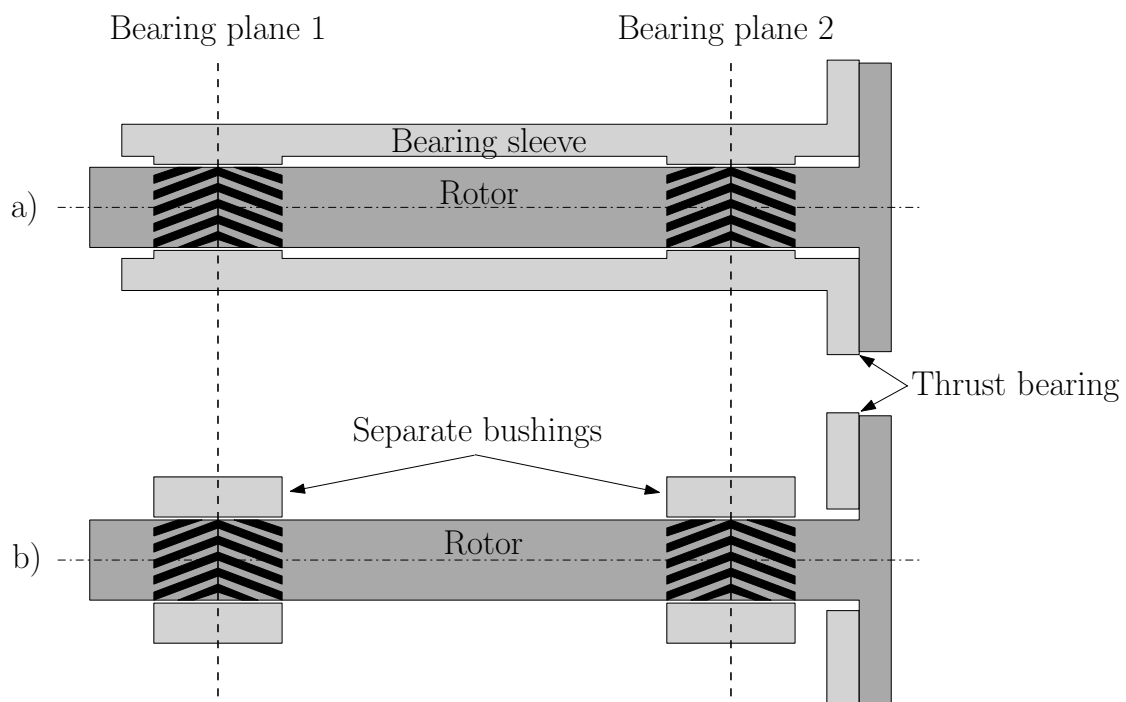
a) Rotor supported on bearing sleeve containing both bearing planes in one part; b) Rotor supported by two separate bearing bushings
